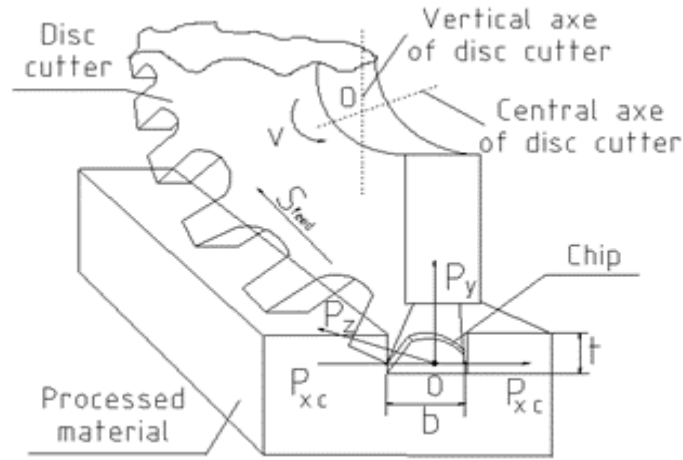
Scheme of milling rectangular grooves on the machining center with CNC portal “profi line BHT 500” (the drawing was made using the LibreCAD program)
